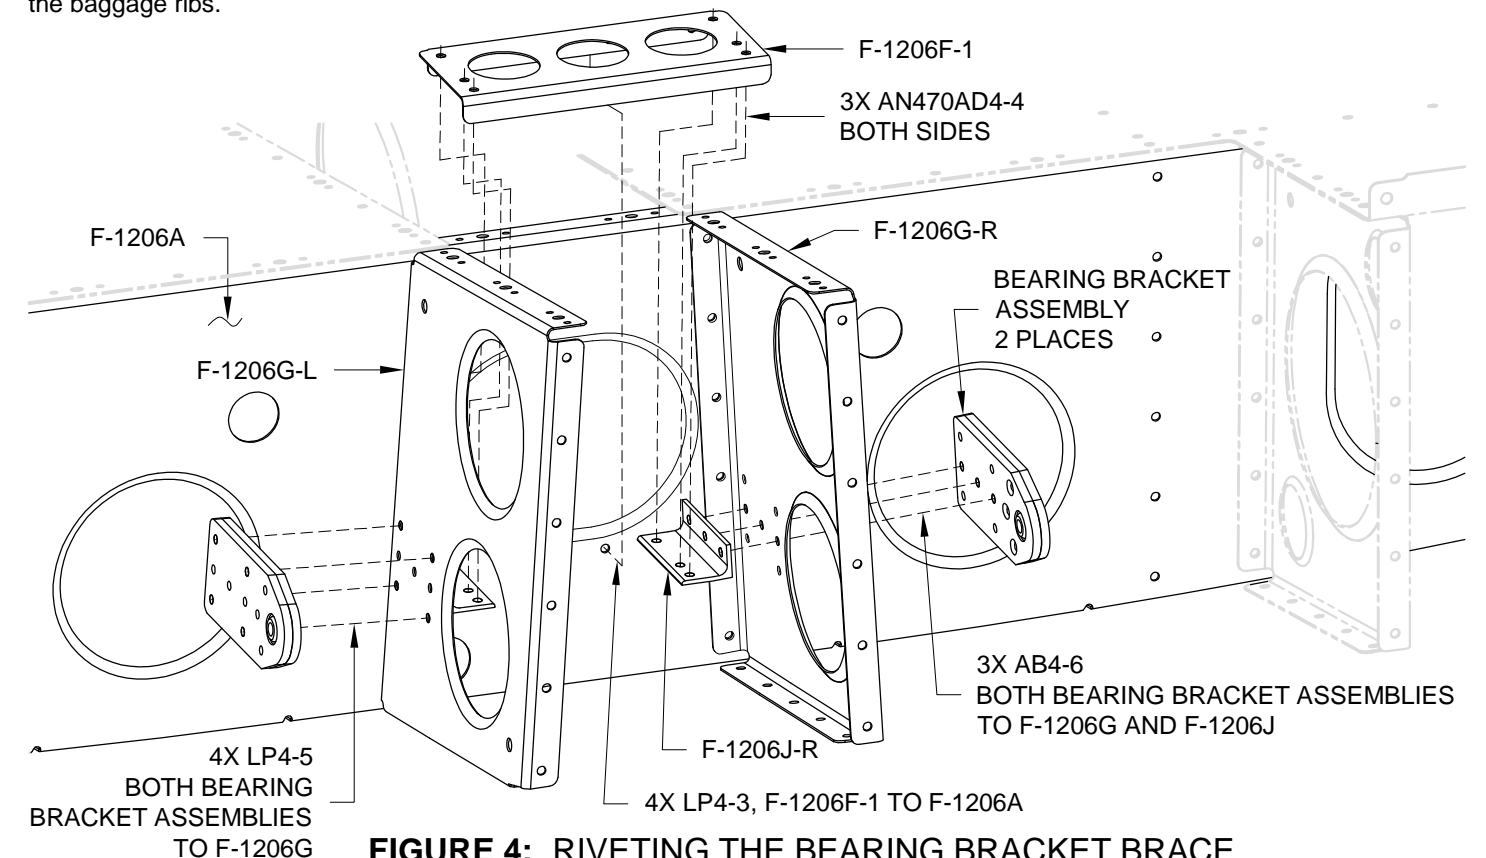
RIVETING THE BEARING BRACKET BRACE
